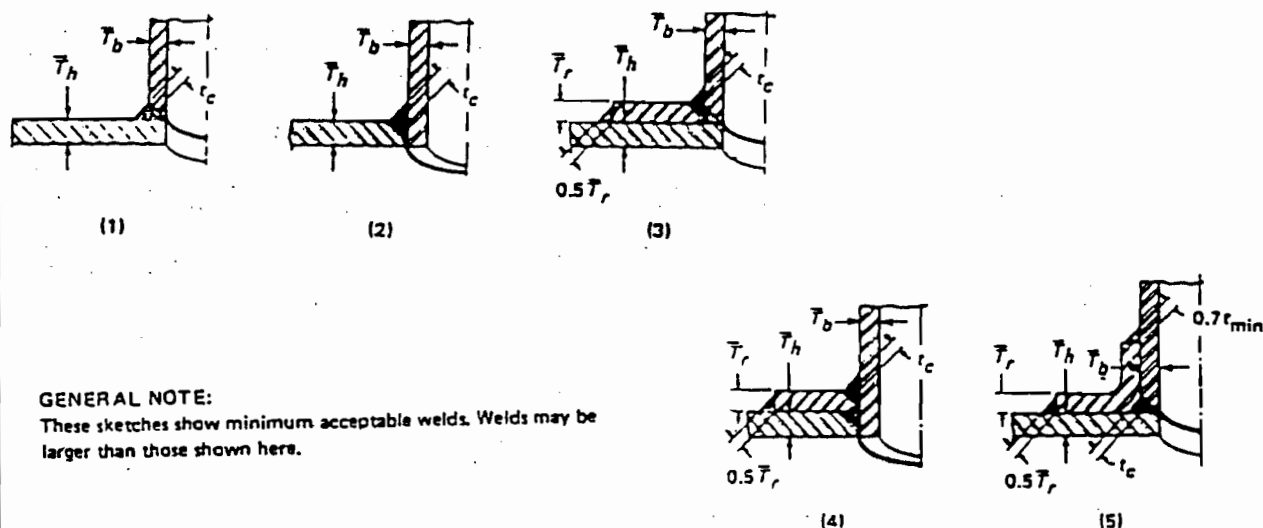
D ACCEPTABLE DETAILS FOR BRANCH ATTACHMENT WELDS
